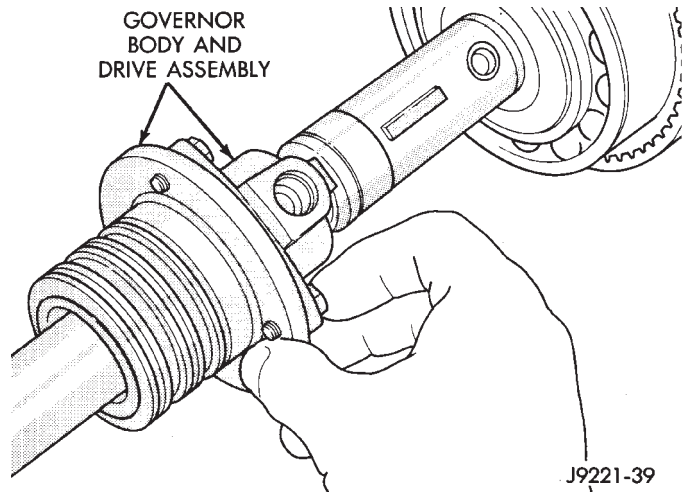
Removing/Installing Governor Body And Drive Assembly
